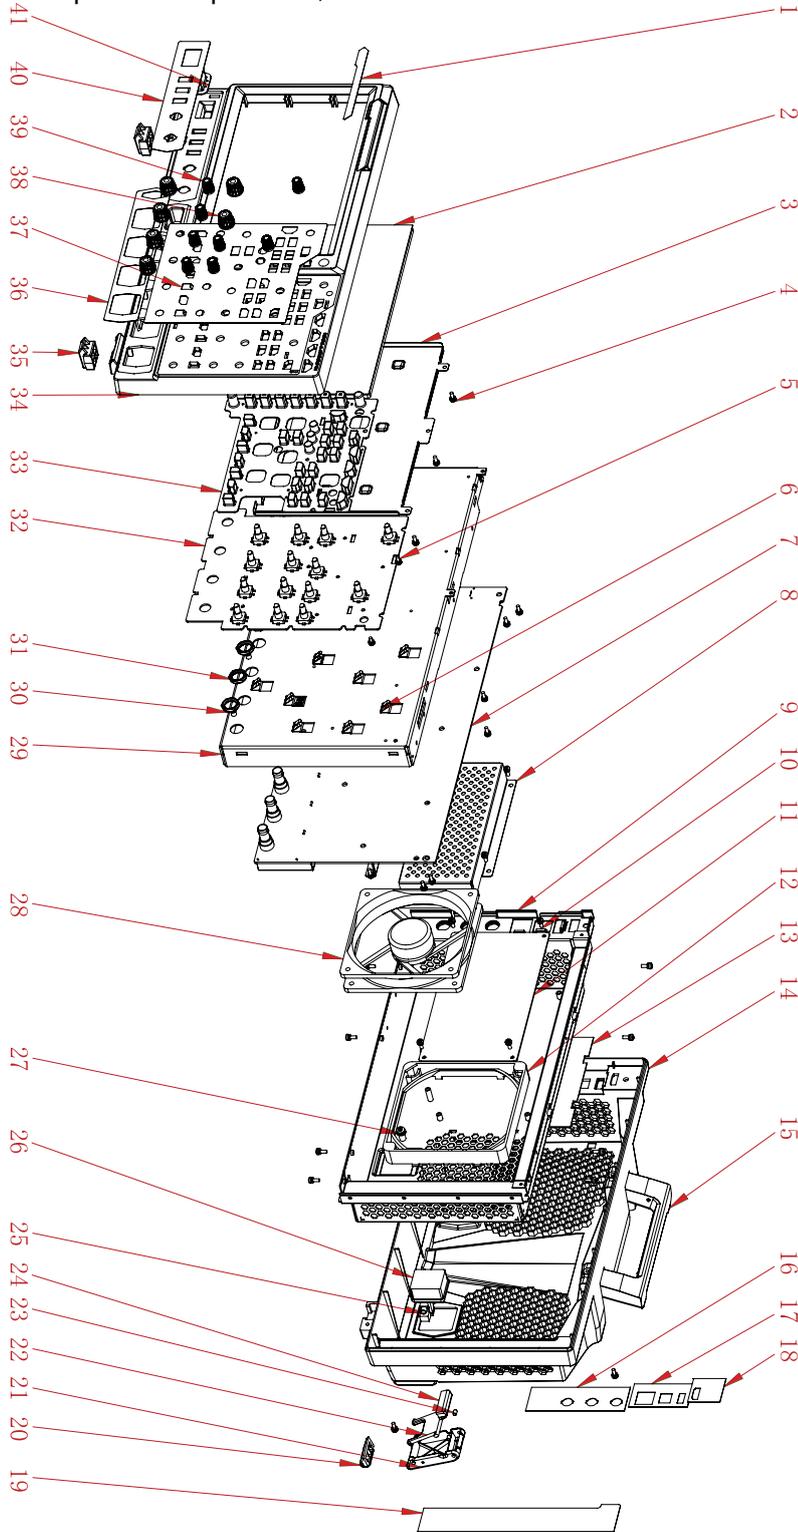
Exploded View Drawing of MSO8000 (Installed with the Function/AWG Option)
